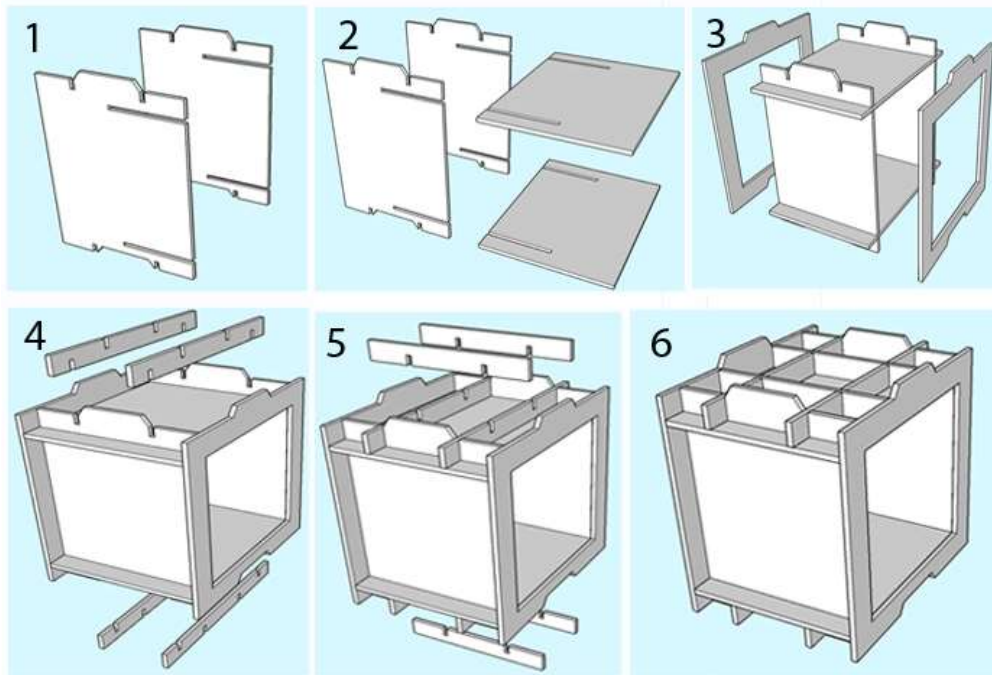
Exploded view of a modular eco-cardboard design, demonstrating the concept of "Design for Disassembly" and adhesive-free connections.
